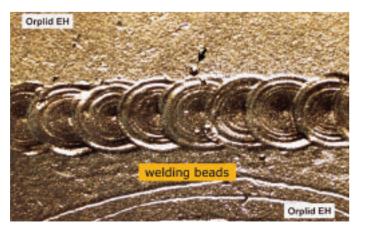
Macroscopic view of the welding seam of a "homogenous" weld of a high-gold-content casting alloy (Orplid EH).
